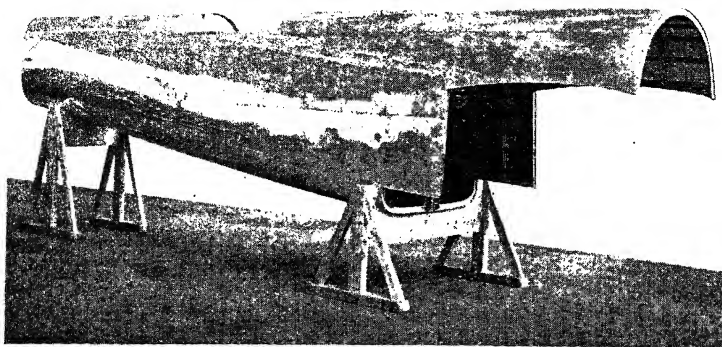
MONOCOQUE STRUCTURE FORMING REAR FUSELAGE OF THE "BRISTOL" BLENHEIM BOMBER.
